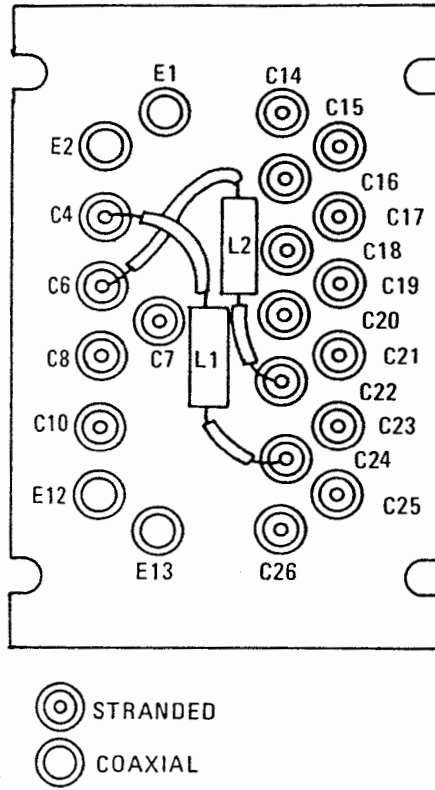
Filter Plate Assembly A2A5FL2 Component Locations
